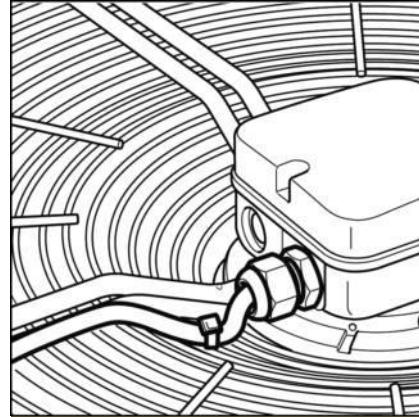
Fan installed lying flat, cable routed as a water trap.
